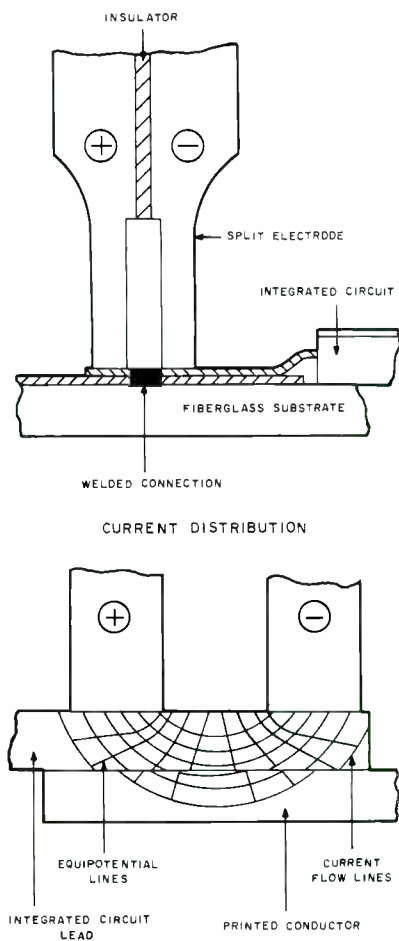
The parallel-gap resistance-welding equipment in use.
